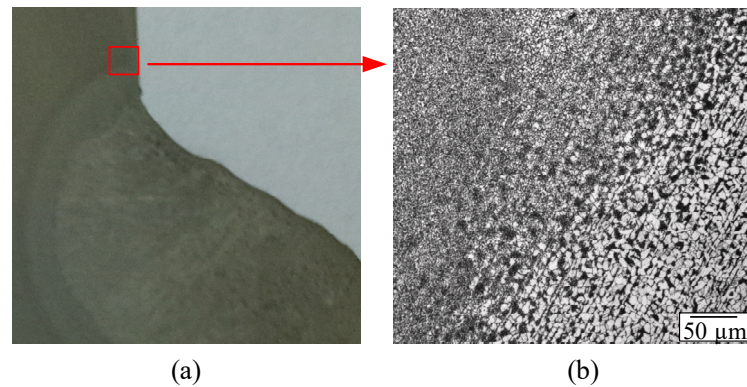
(a) Local grain gradient position of weld toe. (b) Metallography of grain gradient.
